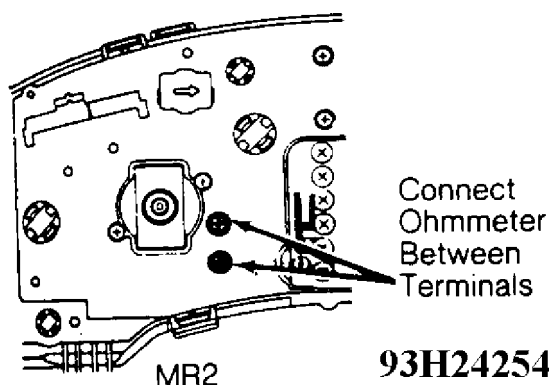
Checking No. 1 Speed Sensor (MR2)
